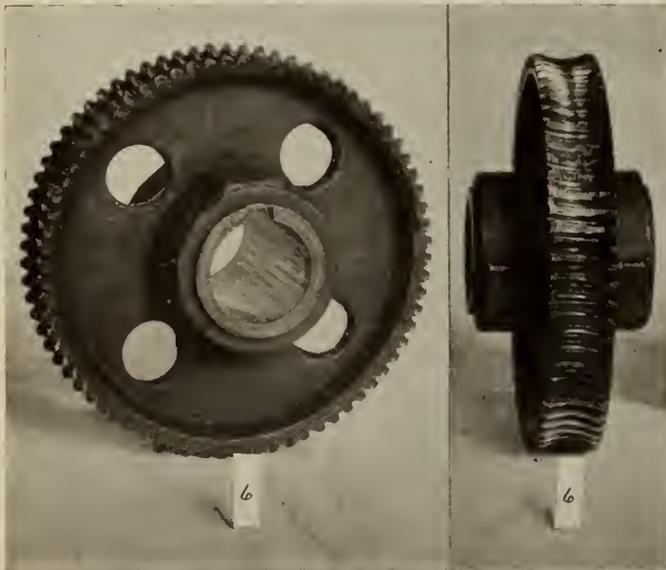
Worm Gear after Test to Destruction, .25-inch c.p., 30-degree p.a. to Mate Single Thread Worm.
